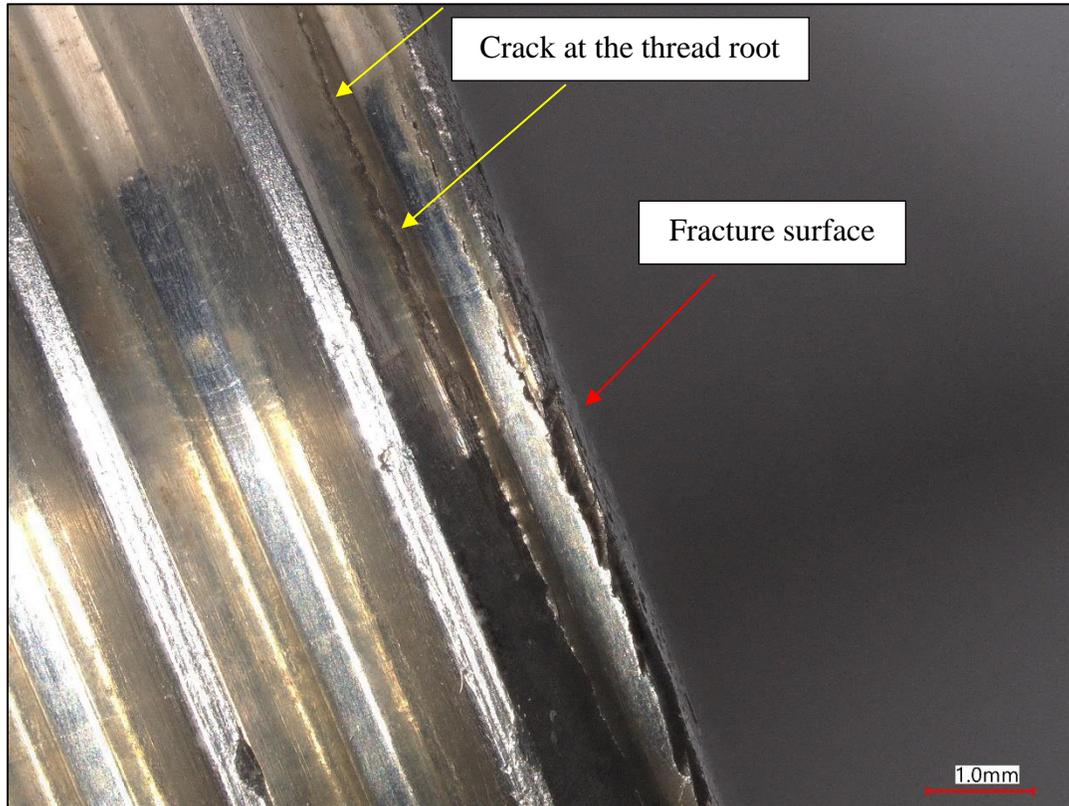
CRACK INITIATION AREA. ADJACENT THREAD ROOTS, BOLT C2
